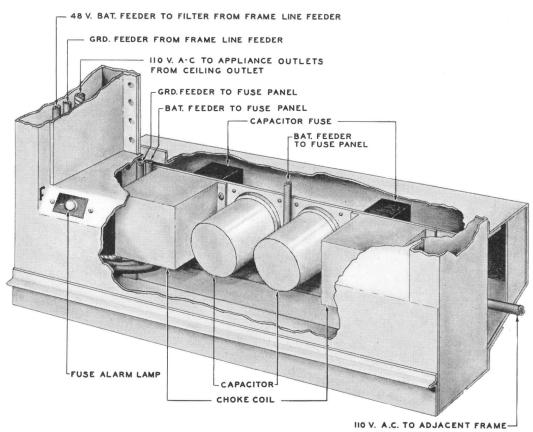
Perspective drawing showing arrangement of base of the No. 5 crossbar frame.
